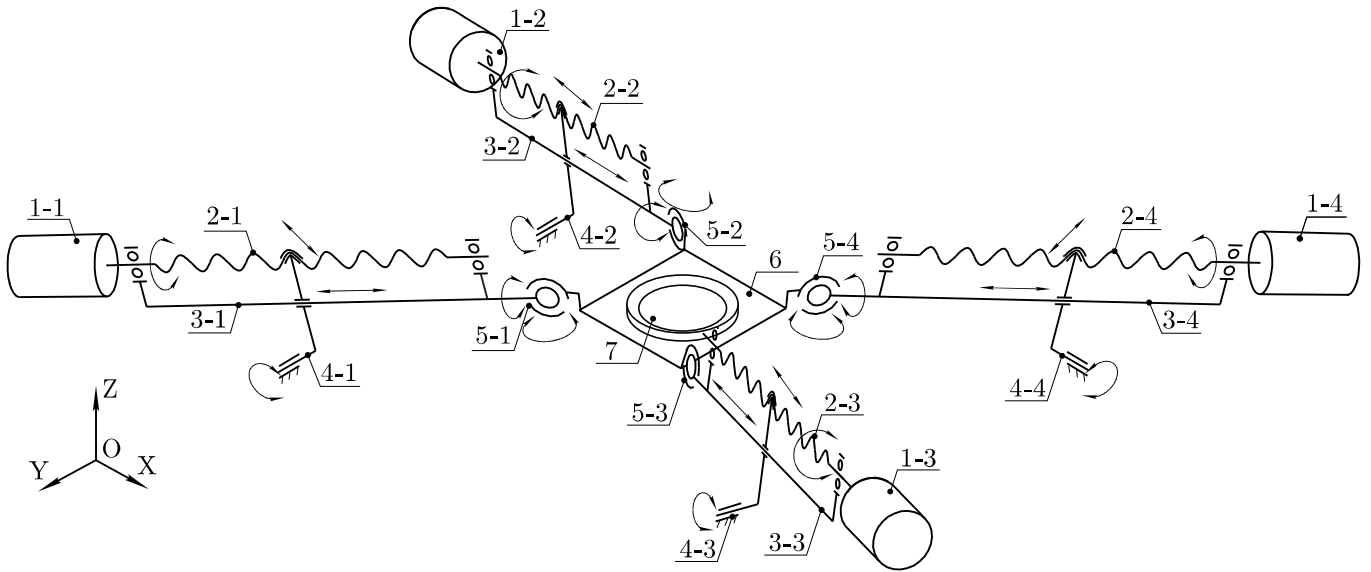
Modified Stewart platform kinematic scheme. 1 – motors, 2 – ball-screws, 3 – sliding shafts, 4 – hinges, 5 – link ball joints, 6 – moving platform, 7 – lens
